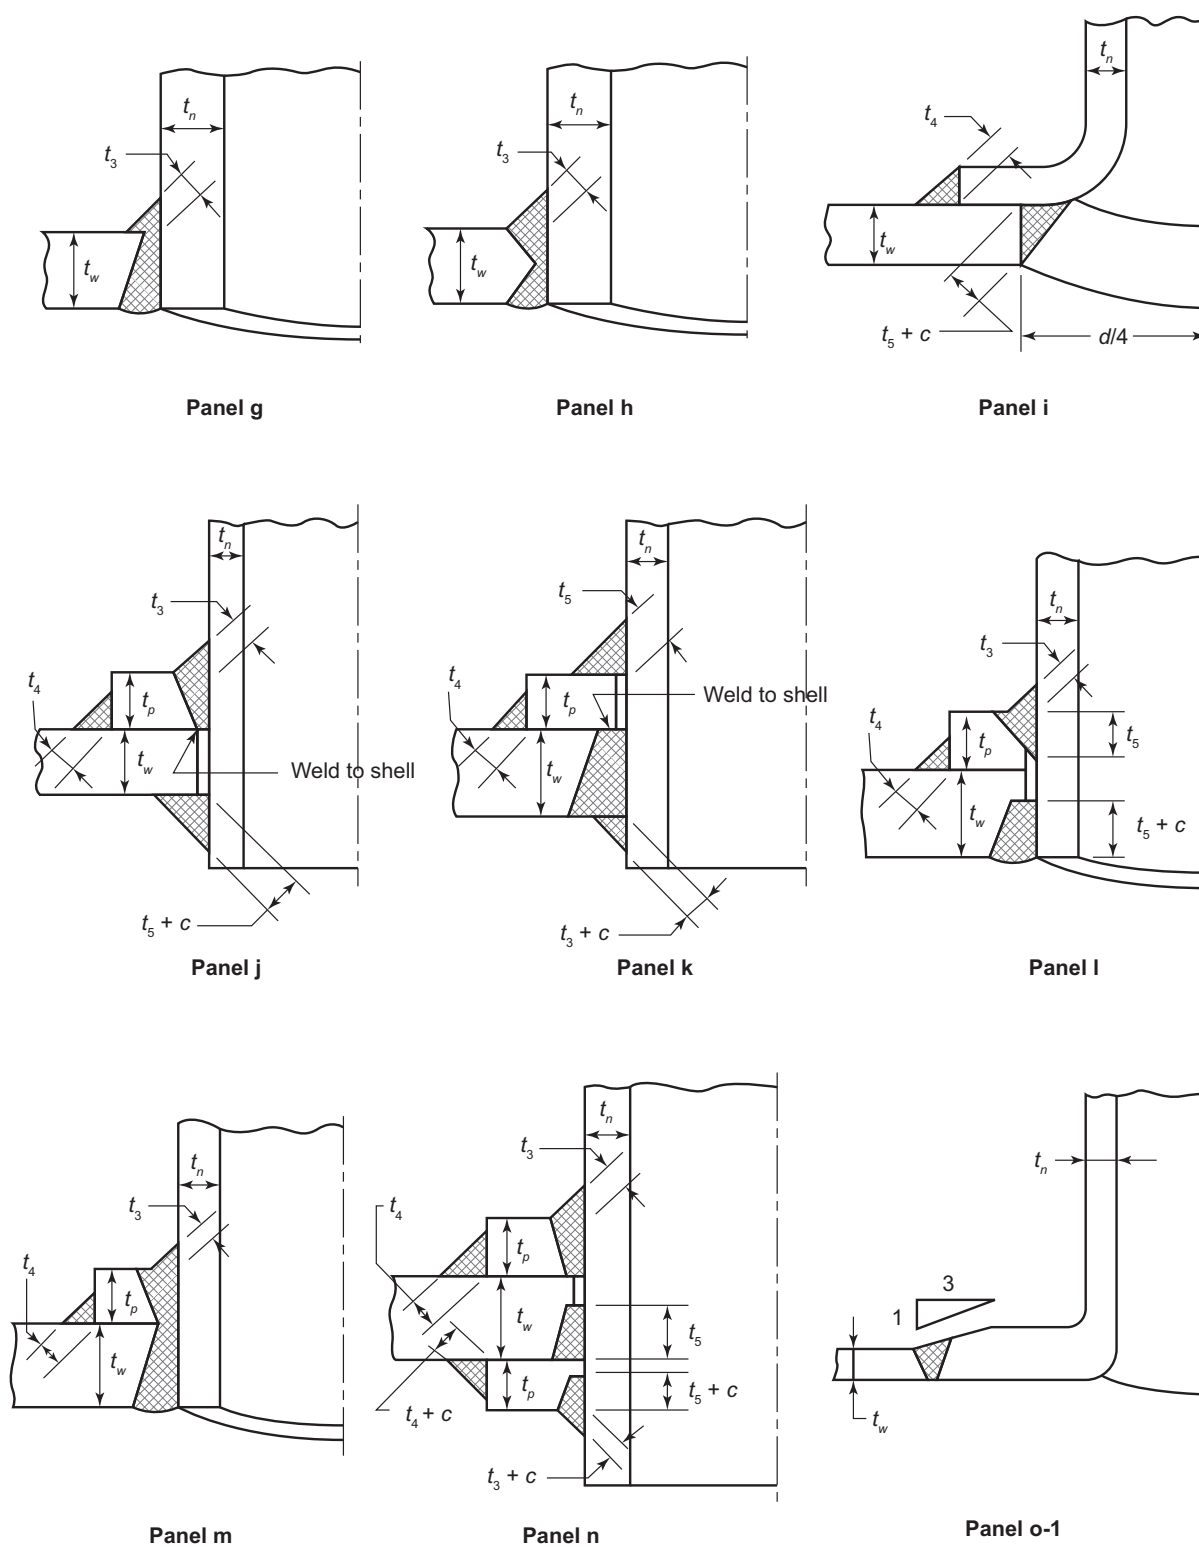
Part 2—Acceptable Types of Welded Nozzles and Other Connections
